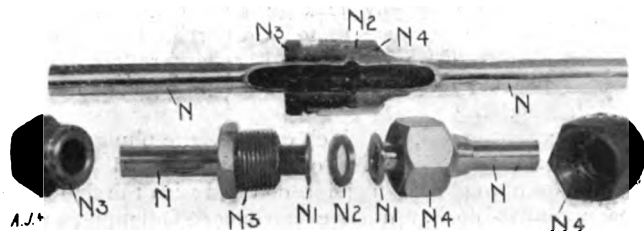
Views showing the special pipe joint employed on the Clarkson Steam Car.
